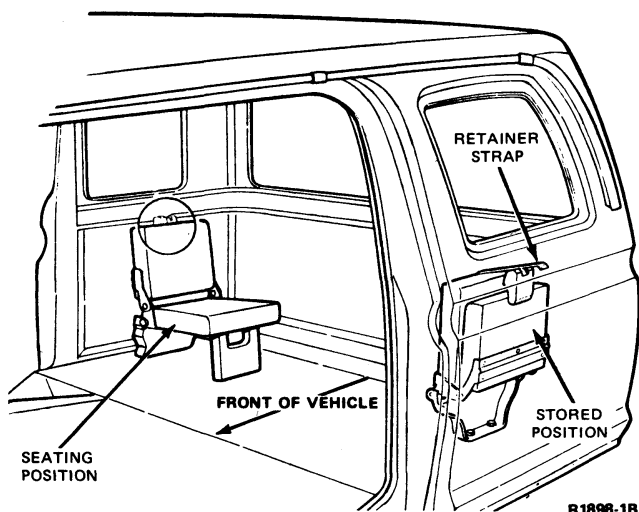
Side-Mounted Folding Rear Seats—F-Series Light Truck Super Cab Models
